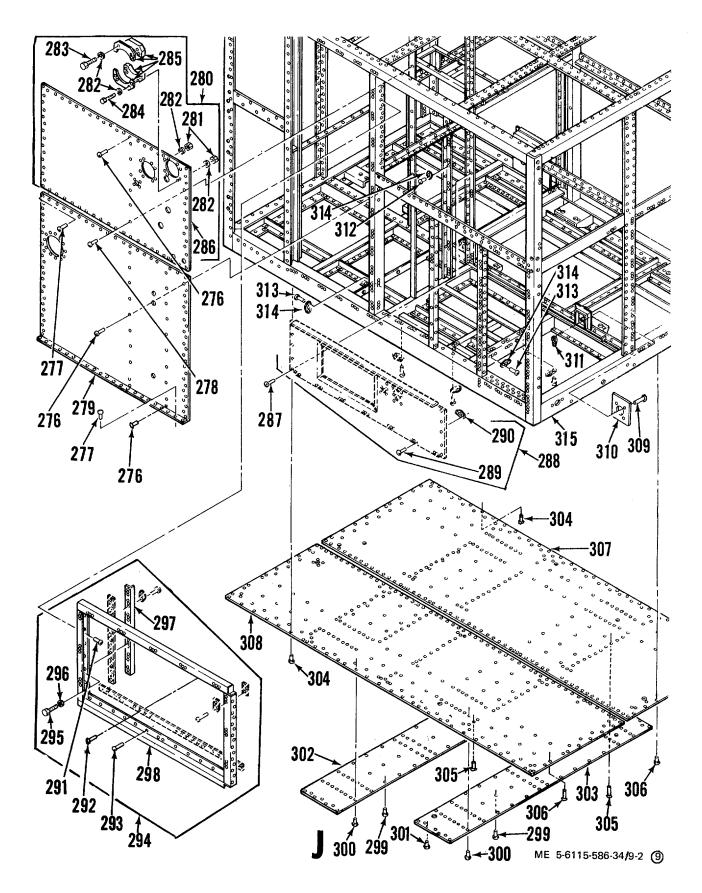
Shell assembly, exploded view. (sheet 9 of 9)
